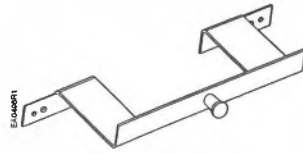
Crank Arm Kit with Mounting Bracket.
